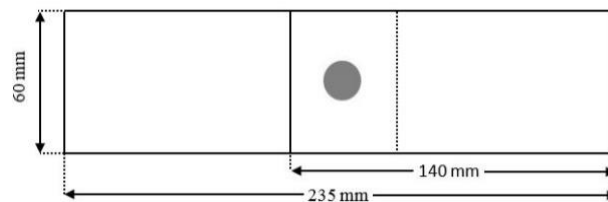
Tensile-shear test sample of the spot welds [12]
